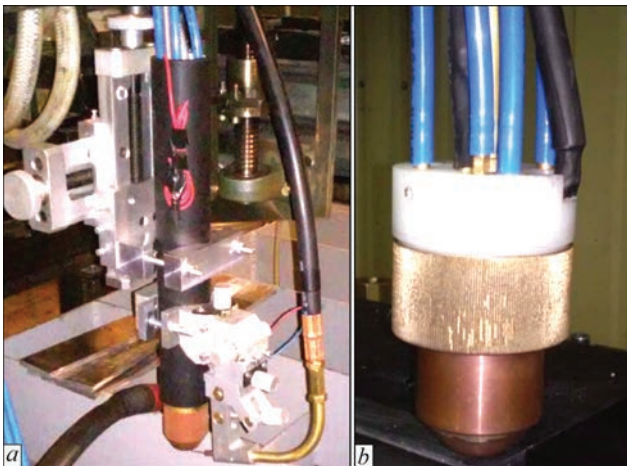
All-purpose equipment complex PLAZER PW-HYBRID TC for nonconsumable-electrode plasma-arc welding, combined and hybrid plasma-arc welding in different spatial positions
